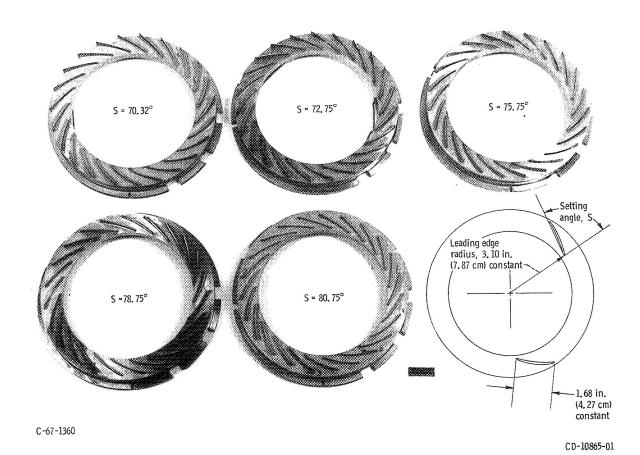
Compressor vaned diffusers with various diffuser vane setting angles.
